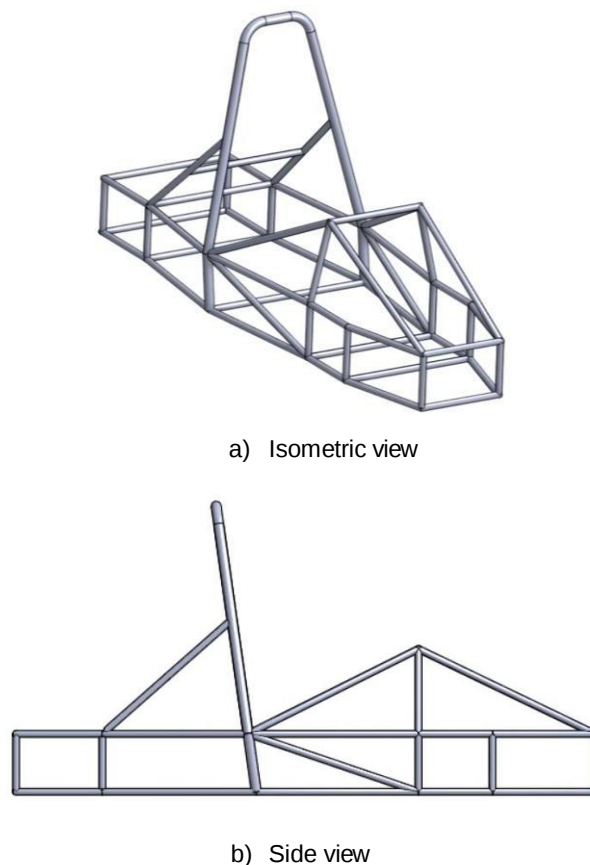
Initial CAD Model of chassis design – a) Isometric view; b) Side view
